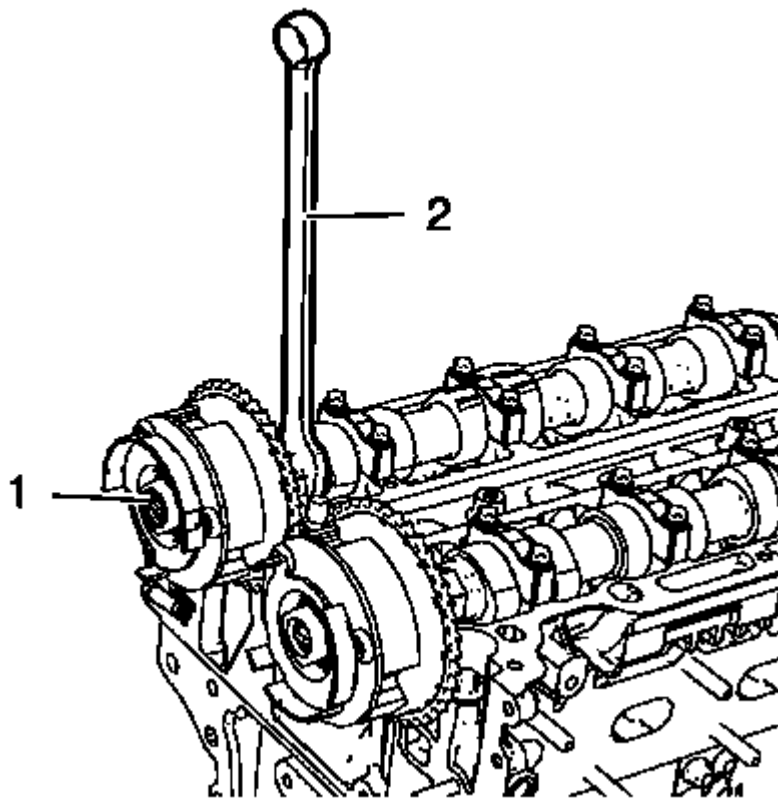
Intake Camshaft And Intake Camshaft Sprocket Bolt
